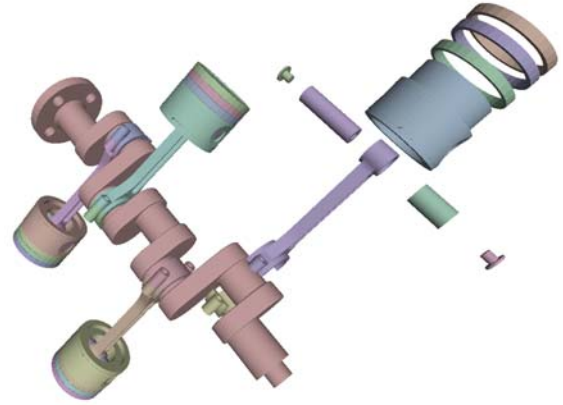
The disassembly generation of one part interaction cluster identified by the algorithm for the crank shaft assembly.
